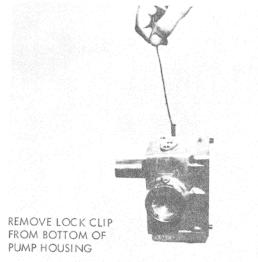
Locking clip being removed from bottom of fuel pump housing.
